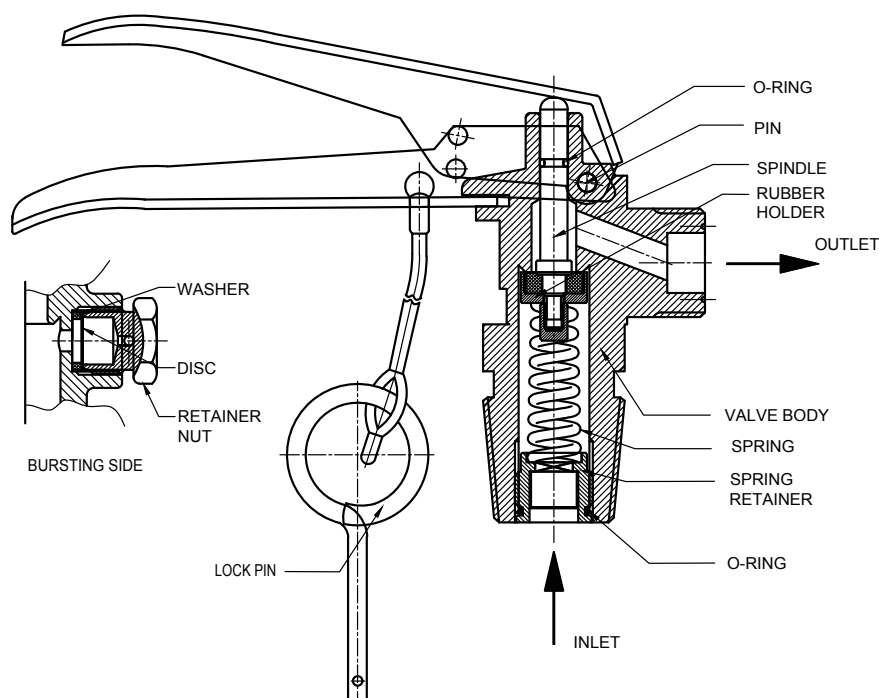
ILLUSTRATION OF SQUEEZE GRIP VALVE (LEVER OPERATED)
